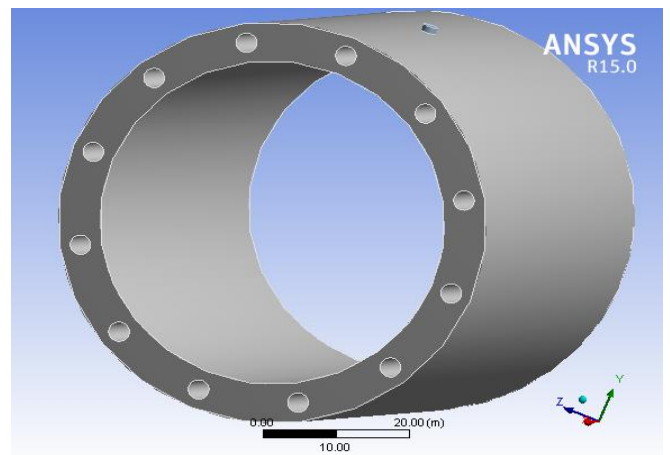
3D model of CFB boiler tube with circular shaped perforations
